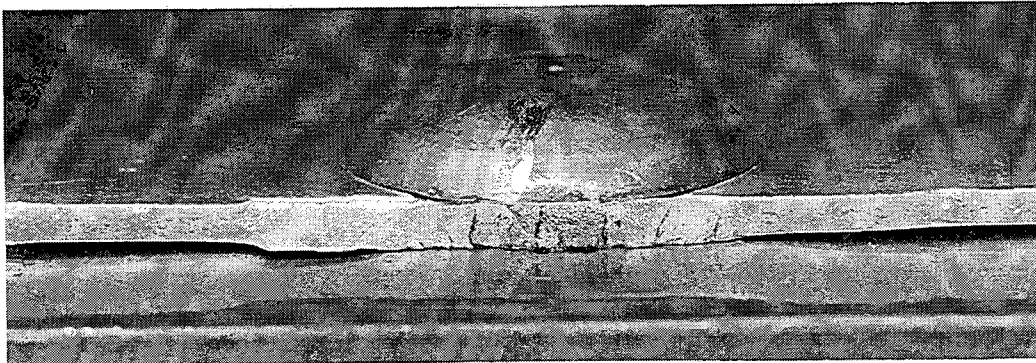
Cracks started ahead of the rivet. Crack path no longer through hole (good clamping).
